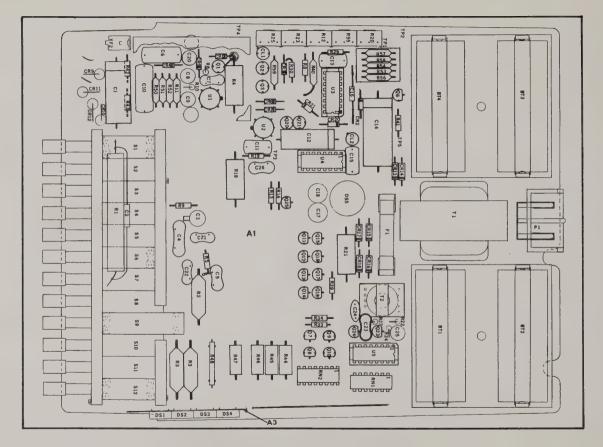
8000A-01 MAIN PCB ASSEMBLY
